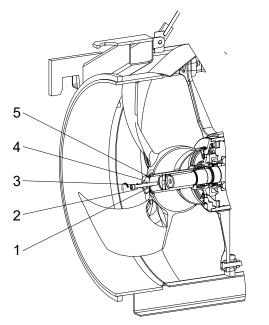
Propeller Disassembly / assembly, XRCP 800 PA
